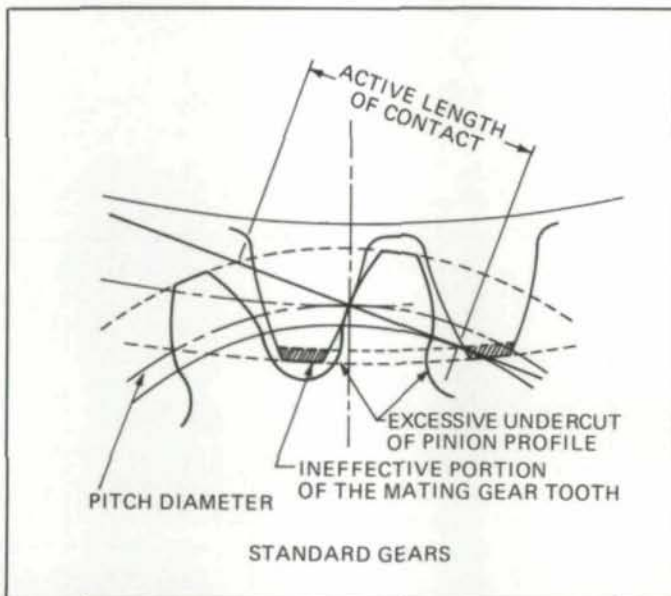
A pair of mating gears with the standard outside diameter of the larger member extending below the limit of the involute profile of the pinion.
